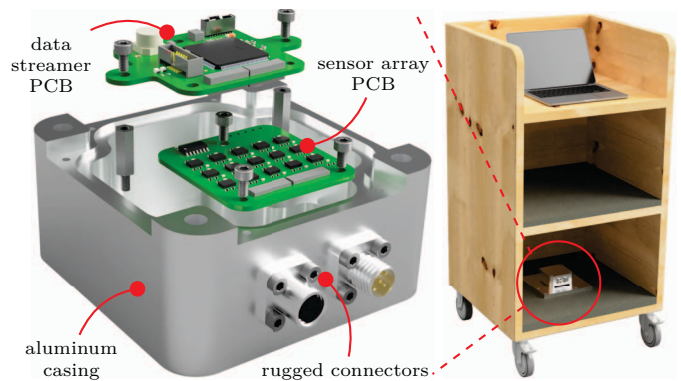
Left: Exploded rendering of the redundant IMU with micro-controller PCB (printed circuit board), sensor array PCB and robust aluminum casing. Cables are not shown. Right: Hand-pushed trolley used to emulate a mobile robotics application.
